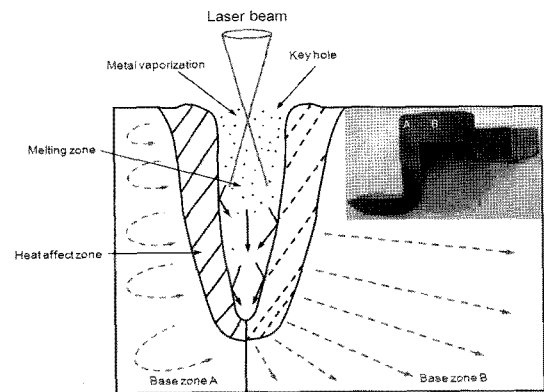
Concept for key hole and cooling with laser welding
